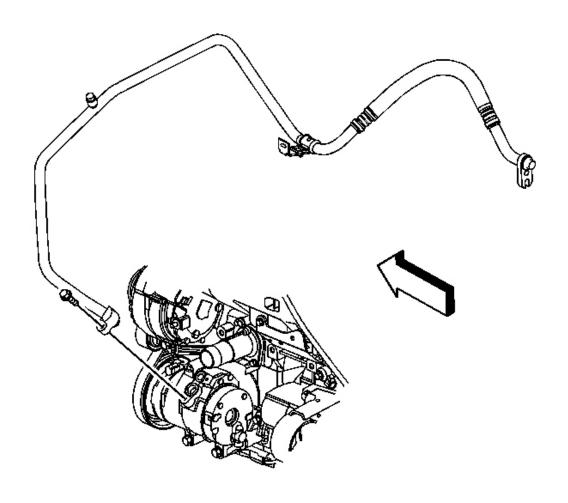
Identifying A/C Evaporator Line Courtesy of GENERAL MOTORS CORP.
